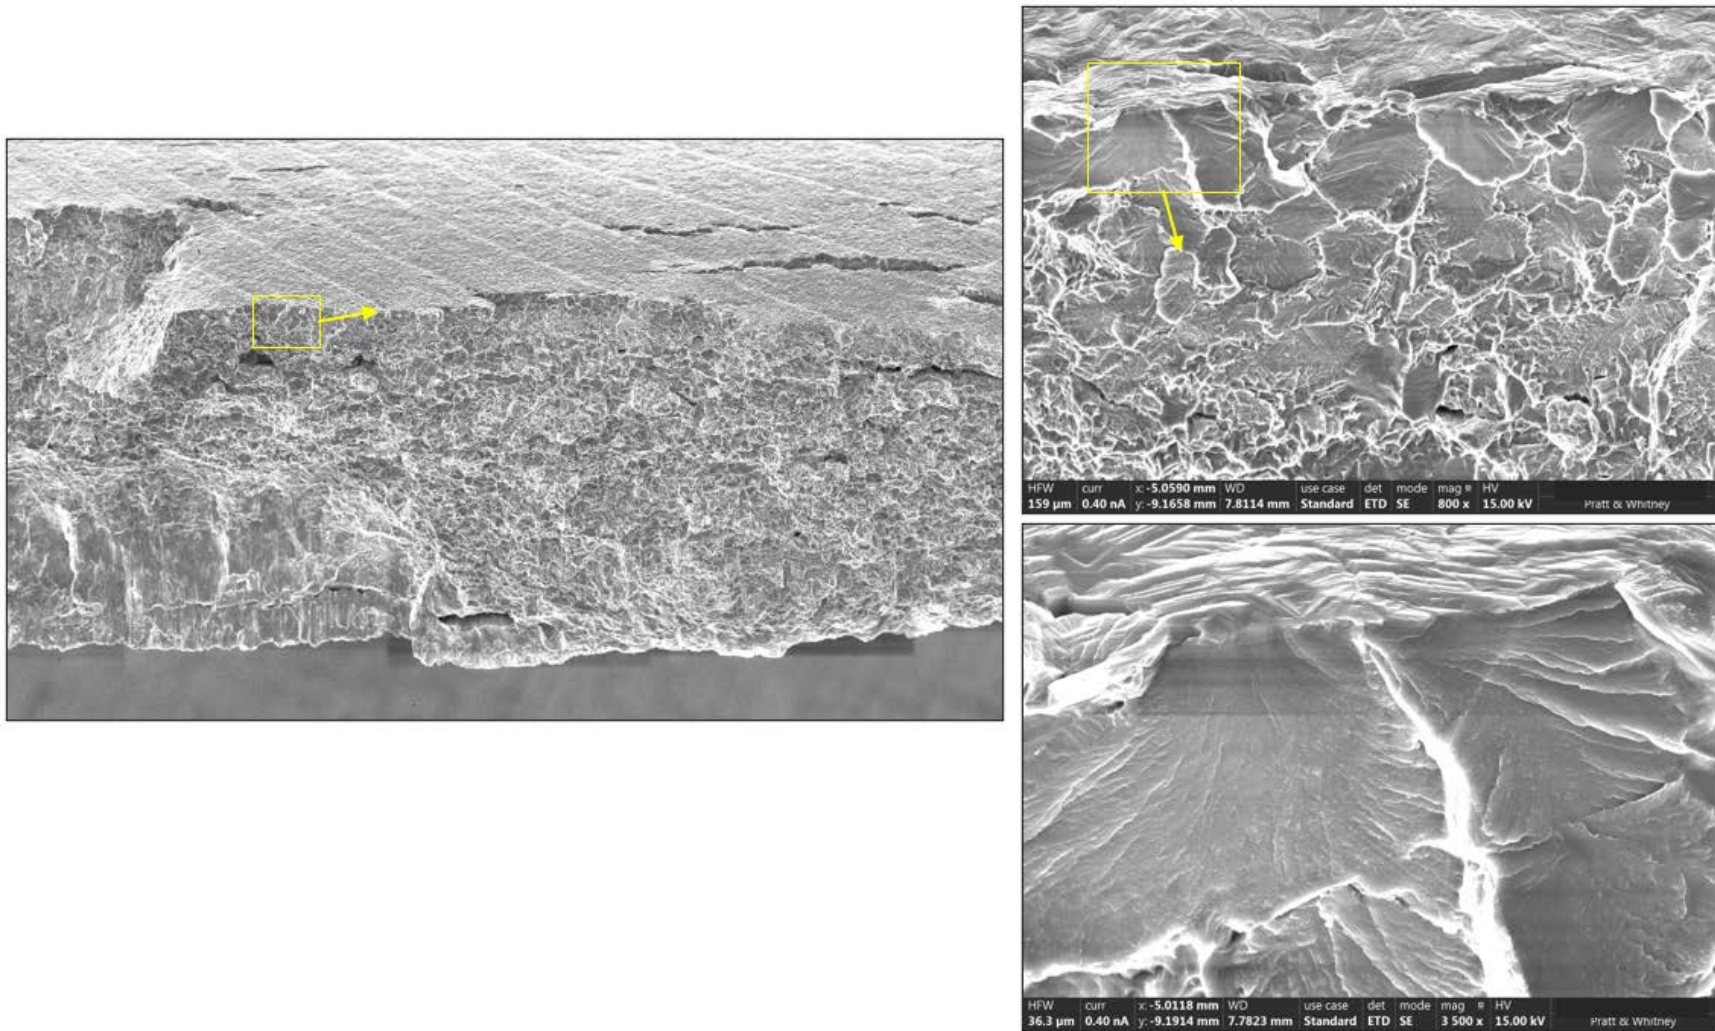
SEM images showing a layer of faceted grains along the surface of the bend test fracture.
